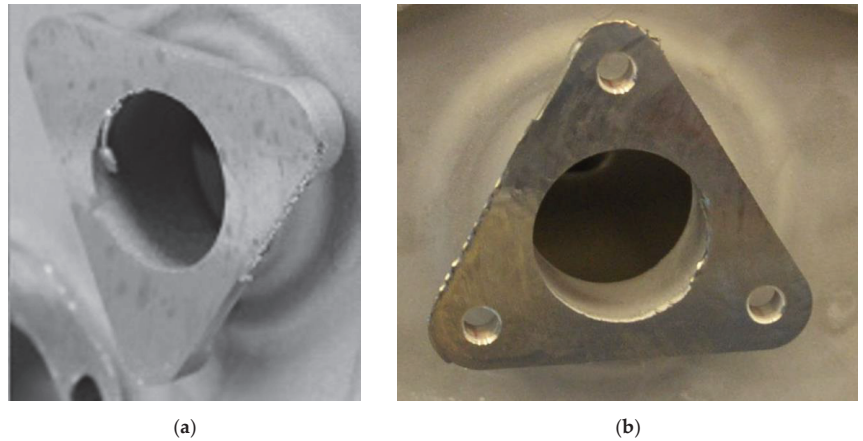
Workpiece sections intended for deburring: (a) raw casting; (b) preprocessed casting with edges to be deburred.
